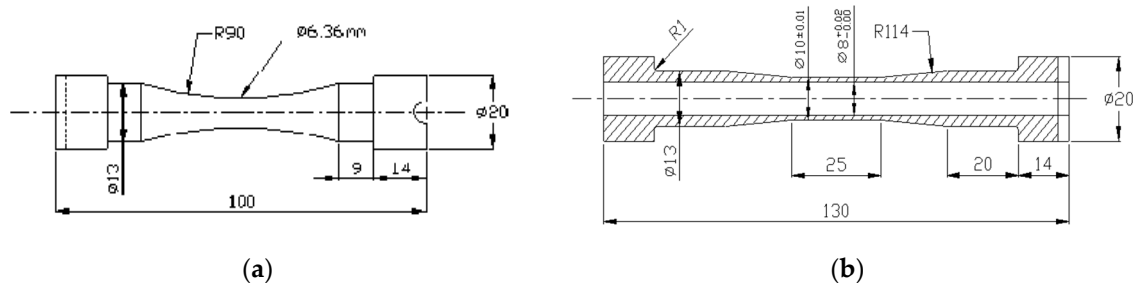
(a) Solid cylindrical toroidal specimen [2]; (b) tubular cylindrical specimen [2].
